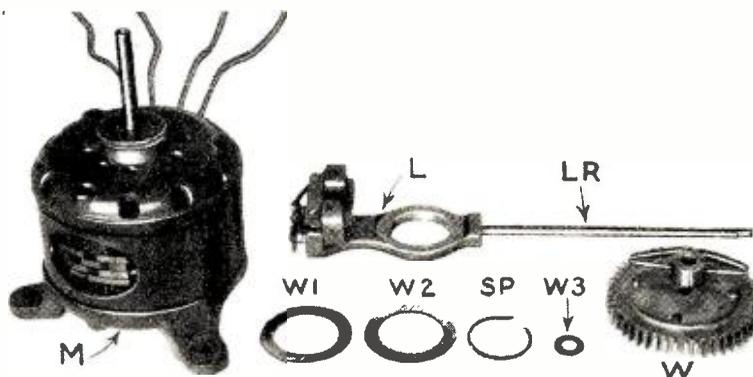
The motor with its auxiliary parts ready for assembly. Details of assembly are described in the text
